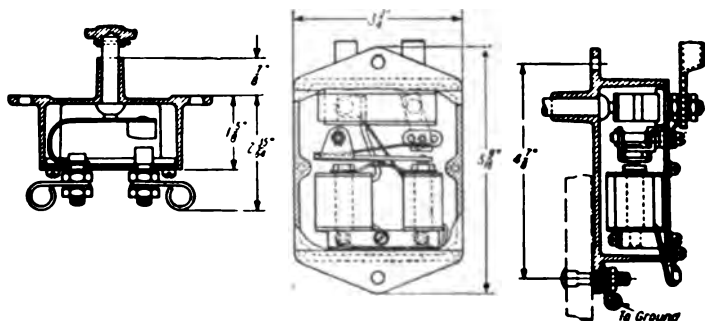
Construction of Westinghouse starting switch and cut-out for Ford installation
